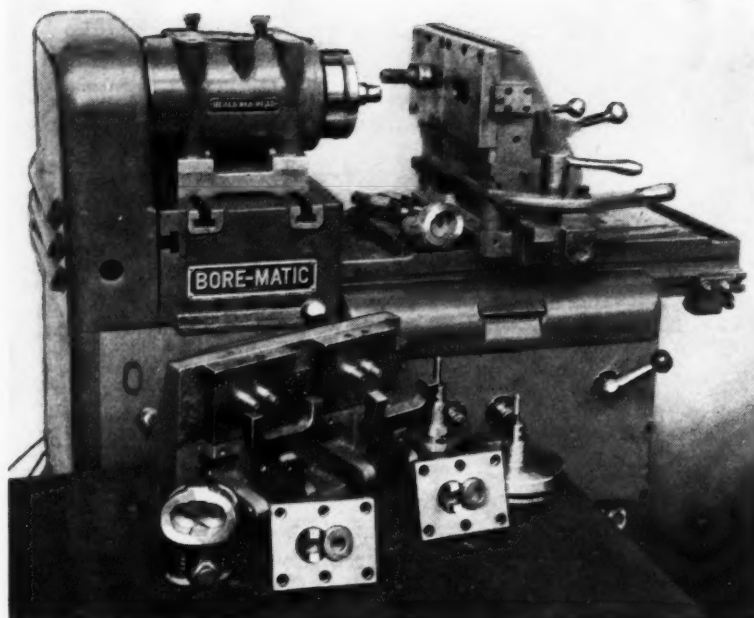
Fixtures and Boring Spindles Used in Machining Gear-pump Bodies on a Heald Bore-Matic
